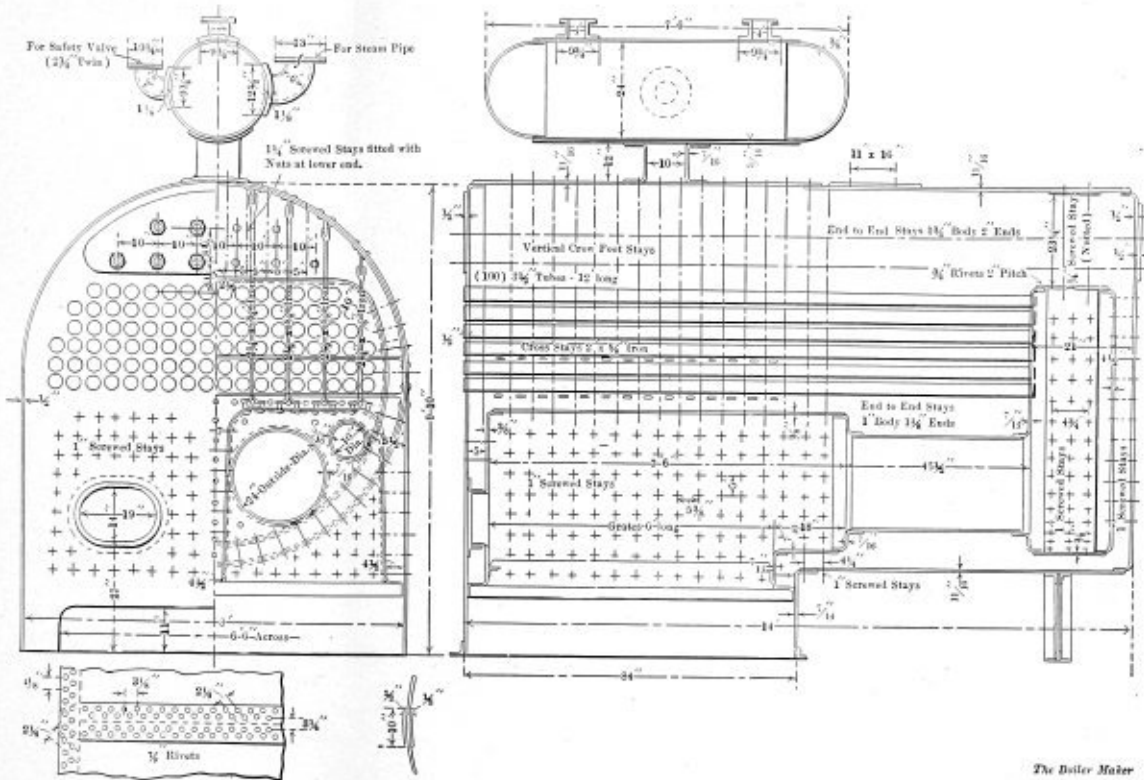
DETAIL DRAWINGS OF A SQUARE FIRE-BOX MARINE BOILER.
